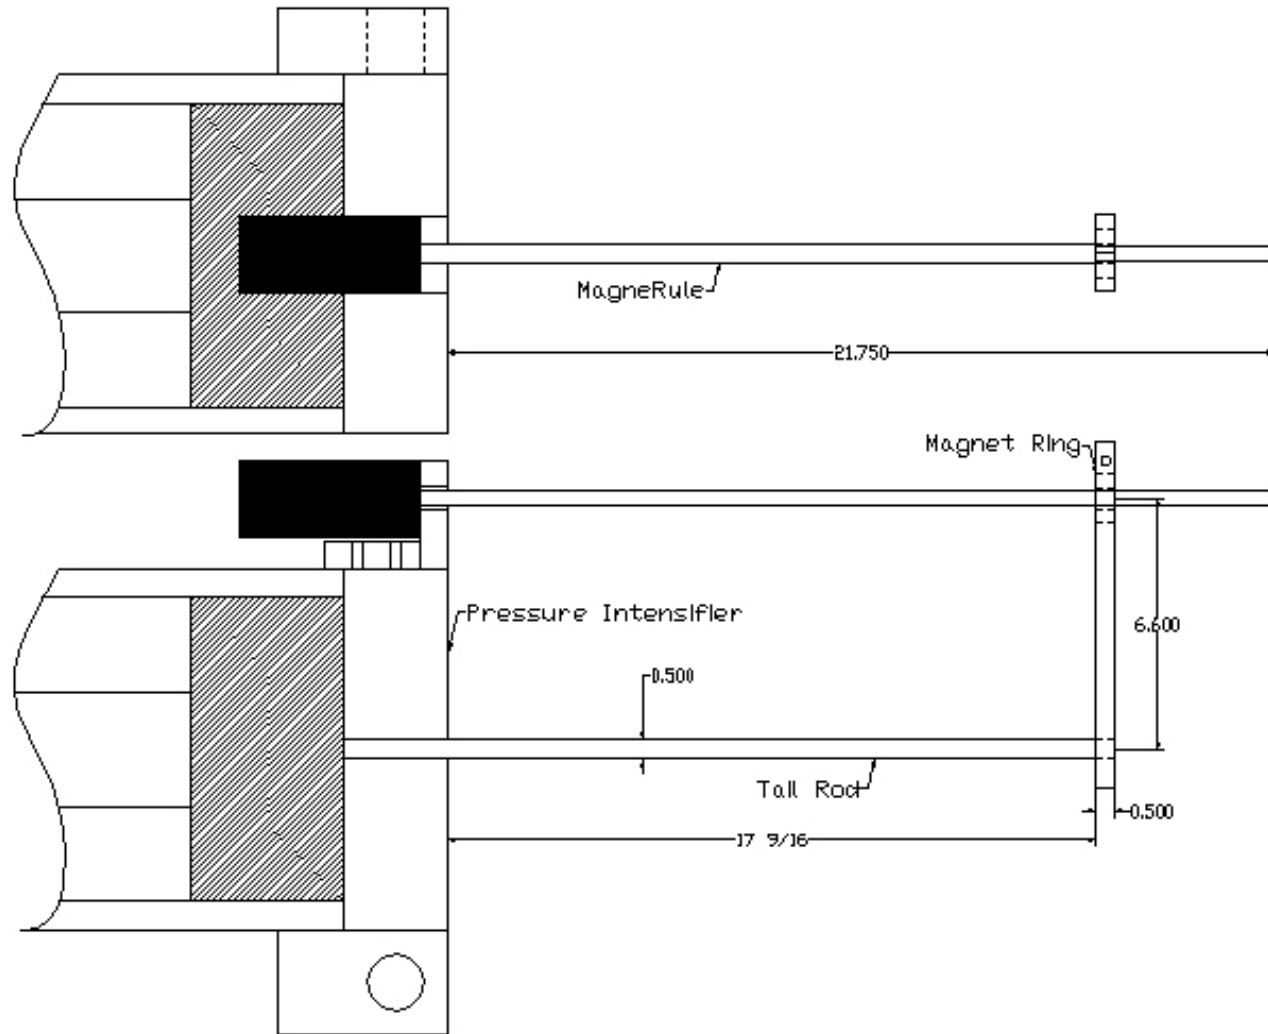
Method of mounting the booster displacement transducer (MagneRule)
